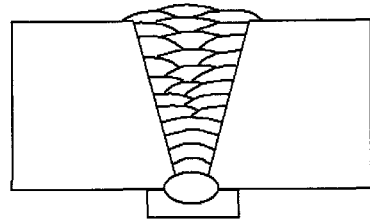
Cross-sectional view of flux cored arc welding
